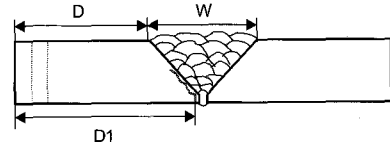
Fabrication Process of mechanical fatigue flawed specimen
